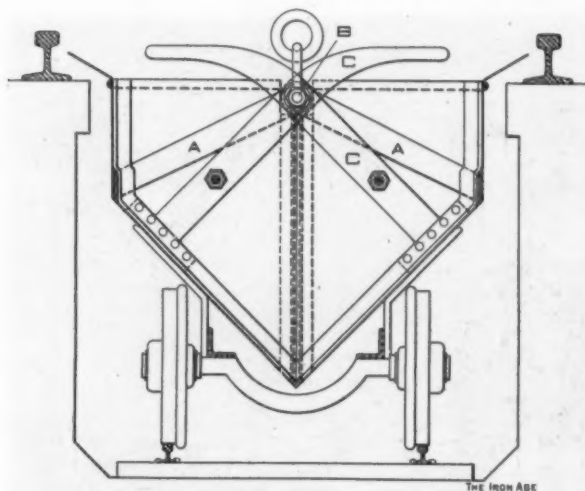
The Bucket in the Pit Ready to Be Filled.
